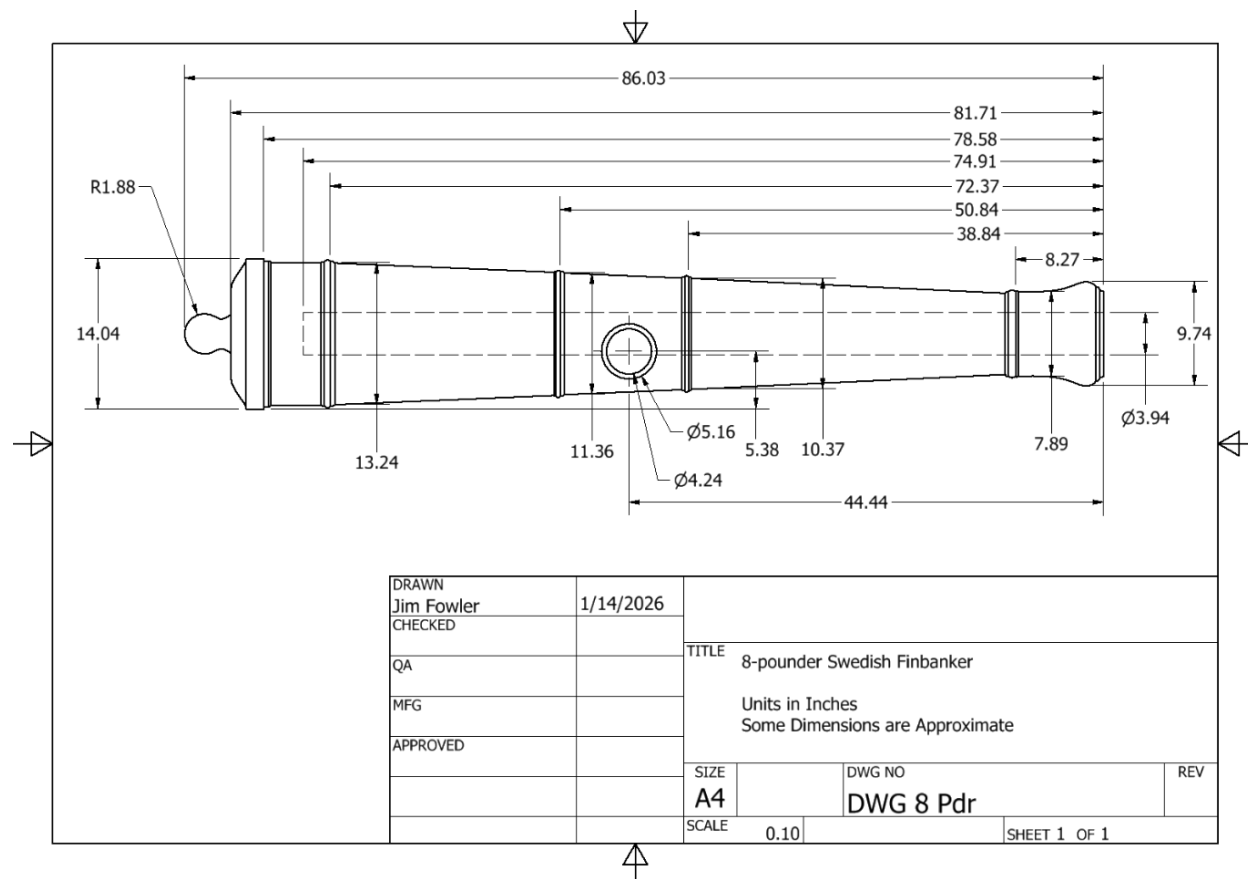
A dimensioned engineering drawing of the 8-pounder Finbanker CAD model. (Created by James Fowler in Autodesk Inventor.)
